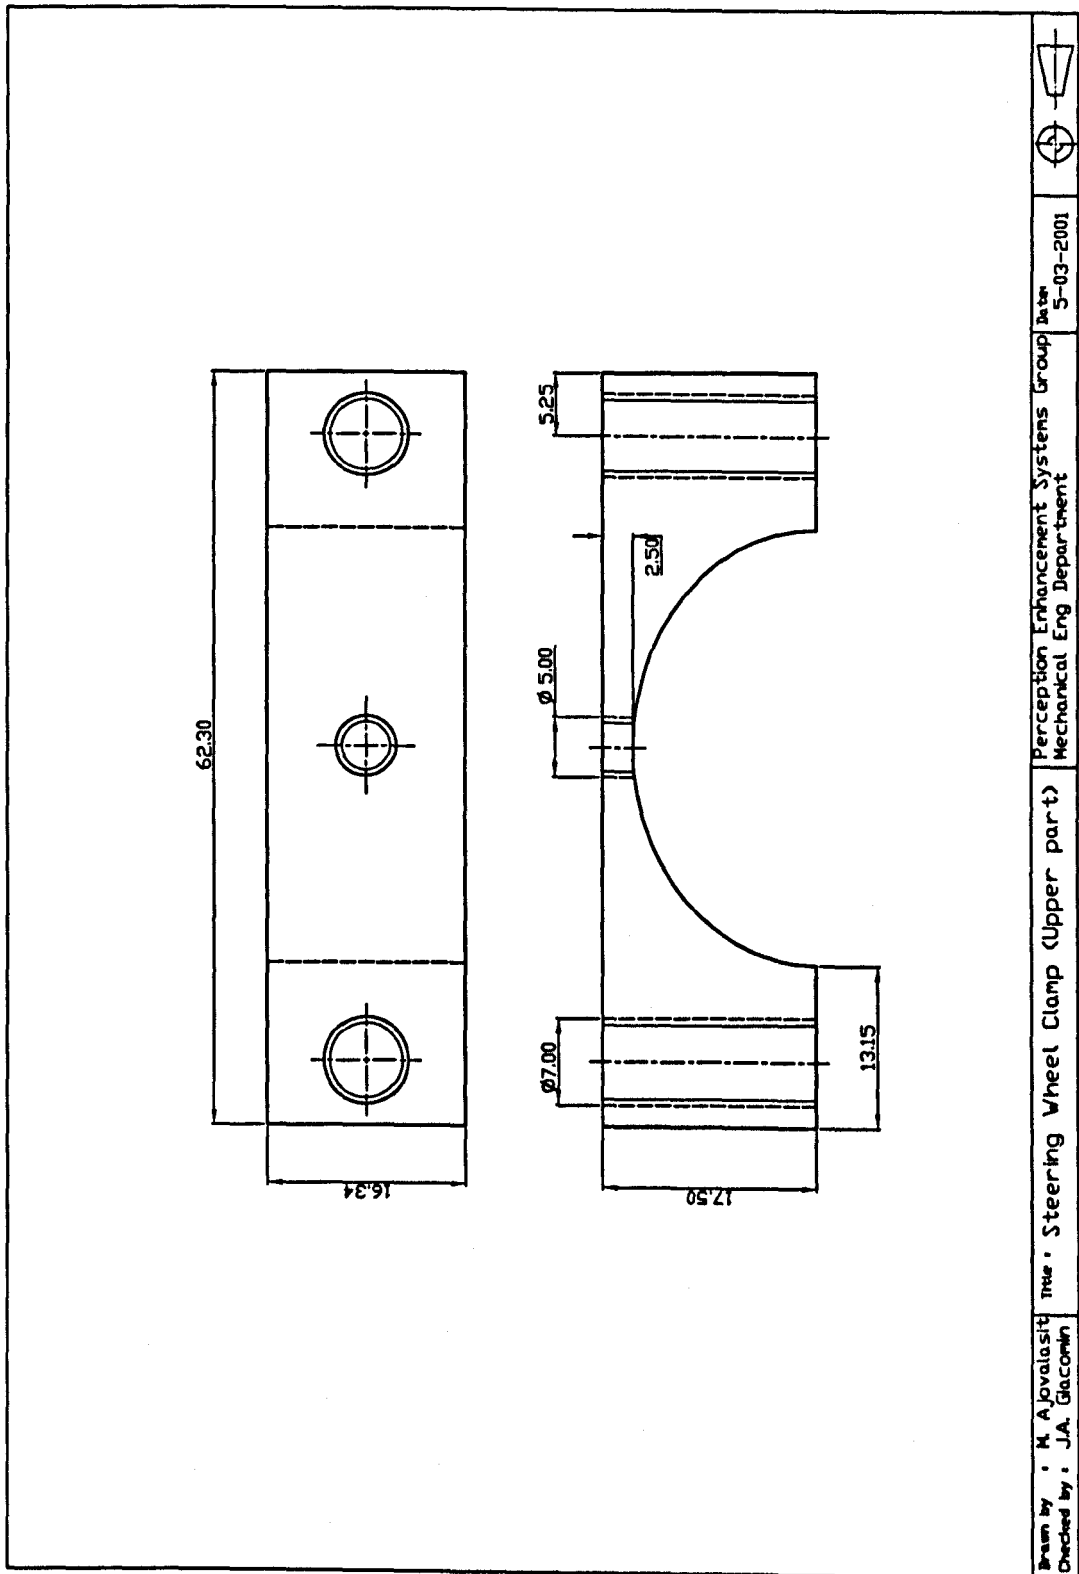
Geometrical dimensional of the upper part of the steering wheel clamp used to record the steering wheel idle vibration on the test automobiles.
